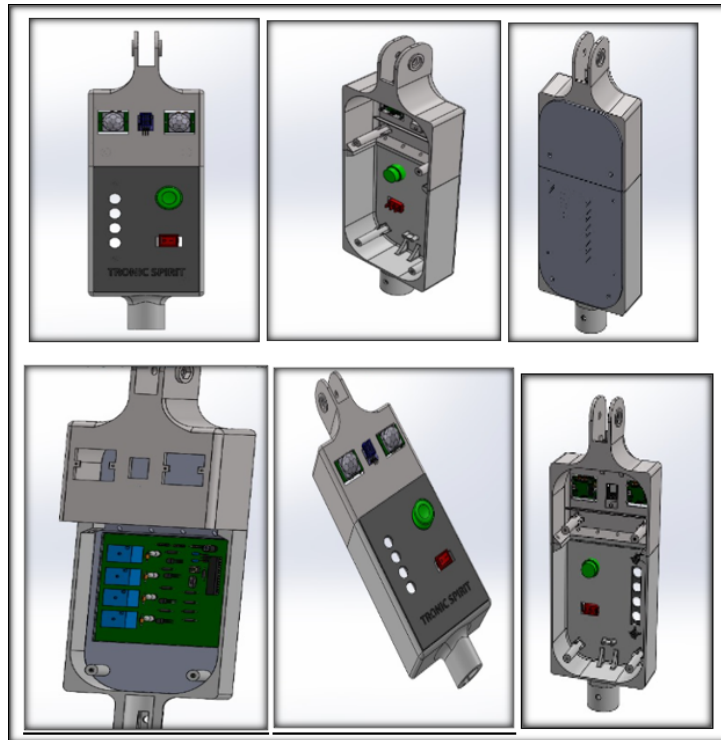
Final Sketch of the Product Enclosure using SolidWorks
